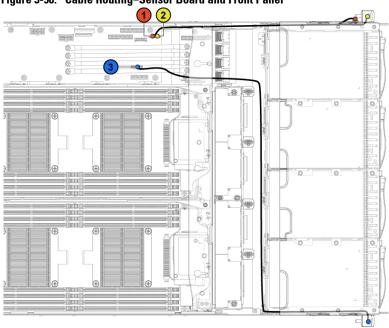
Cable Routing-Sensor Board and Front Panel
